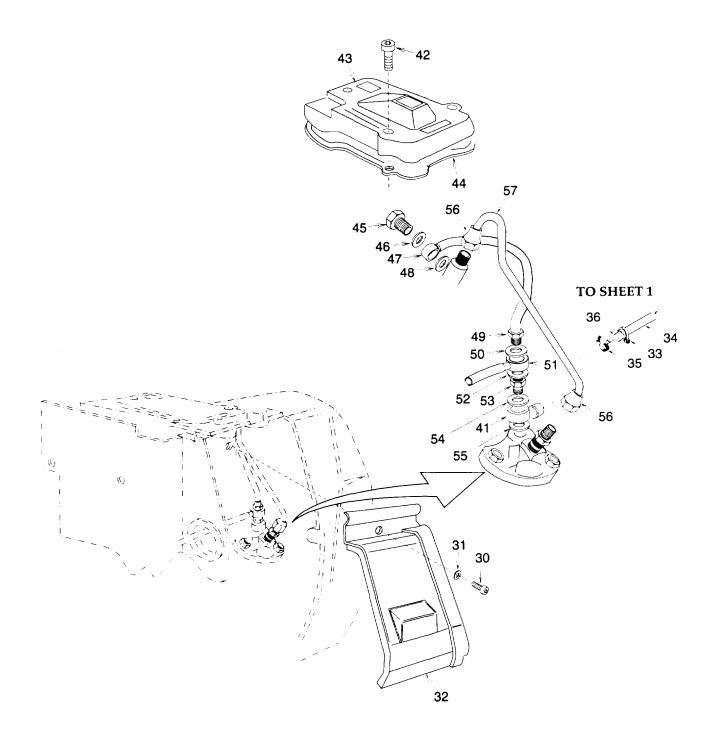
Fuel Supply Hoses (Sheet 2 of 2)
